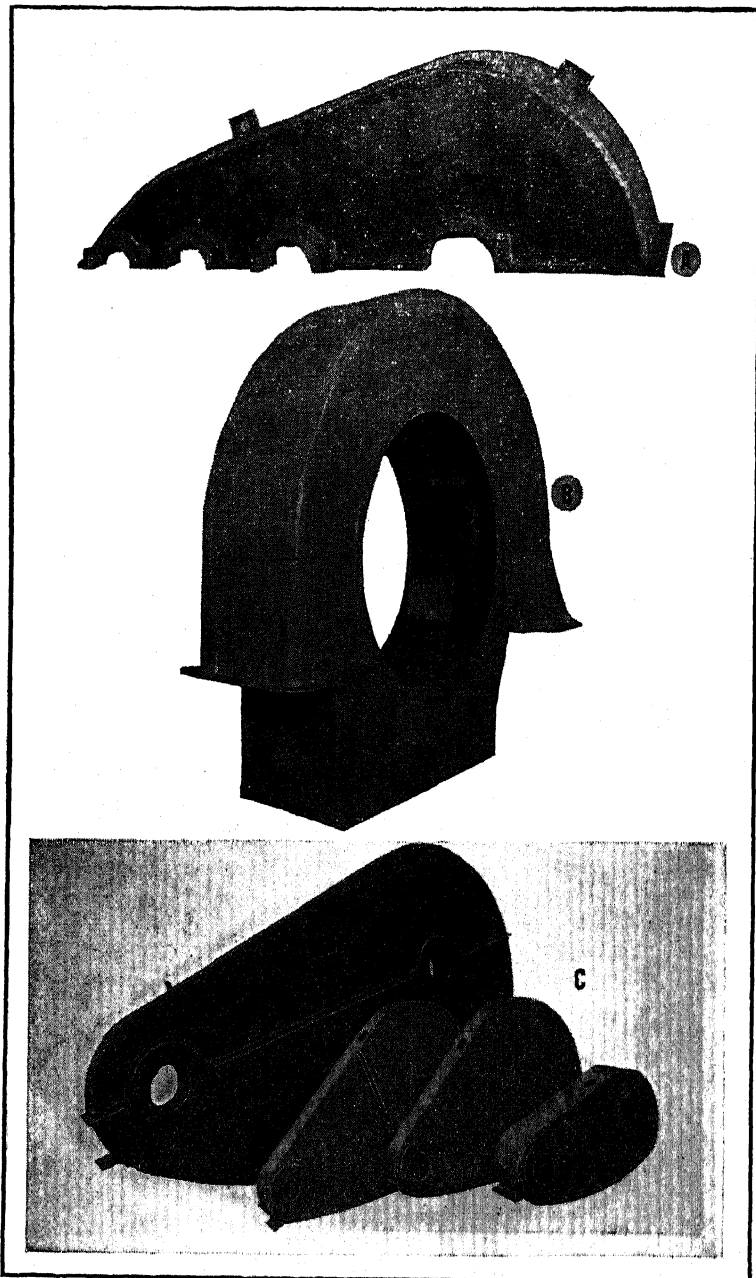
COVERS—(A) Cover for rolling mill drive, weight 4,000 lbs. (B) Generator casing. (C) Chain guards of various sizes.
